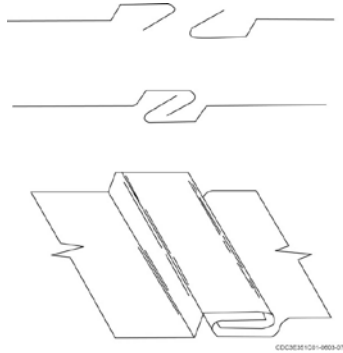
Grooved seam made with a Pittsburgh lock-forming machine.
